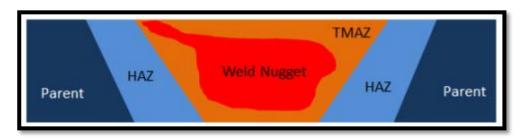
FSW diagram showing parent material, HAZ, TMAZ and weld nugget.
